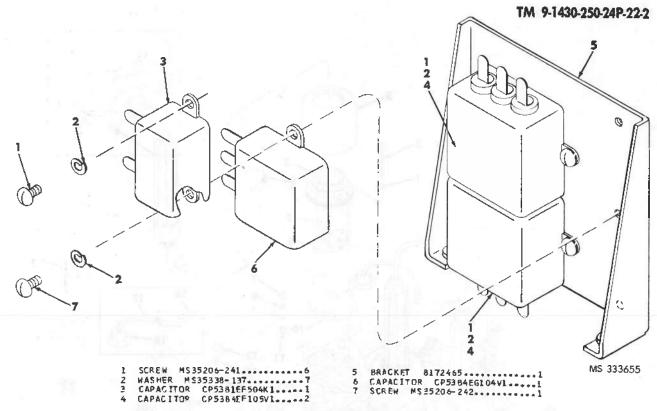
CAPACITOR ASSEMBLY /0172464/-EXPLODED VIEW /SEE FIGURE 21 FOR NEXT MIGHER ASSEMBLY/
